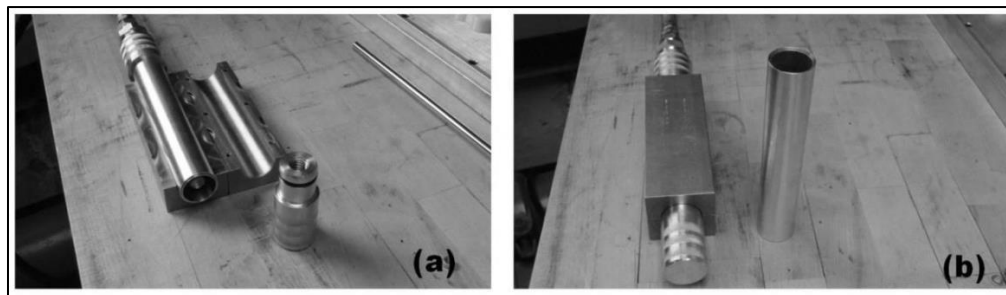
(a) Hydroforming test rig with the annular target in place and (b) assembled hydroforming test rig.
